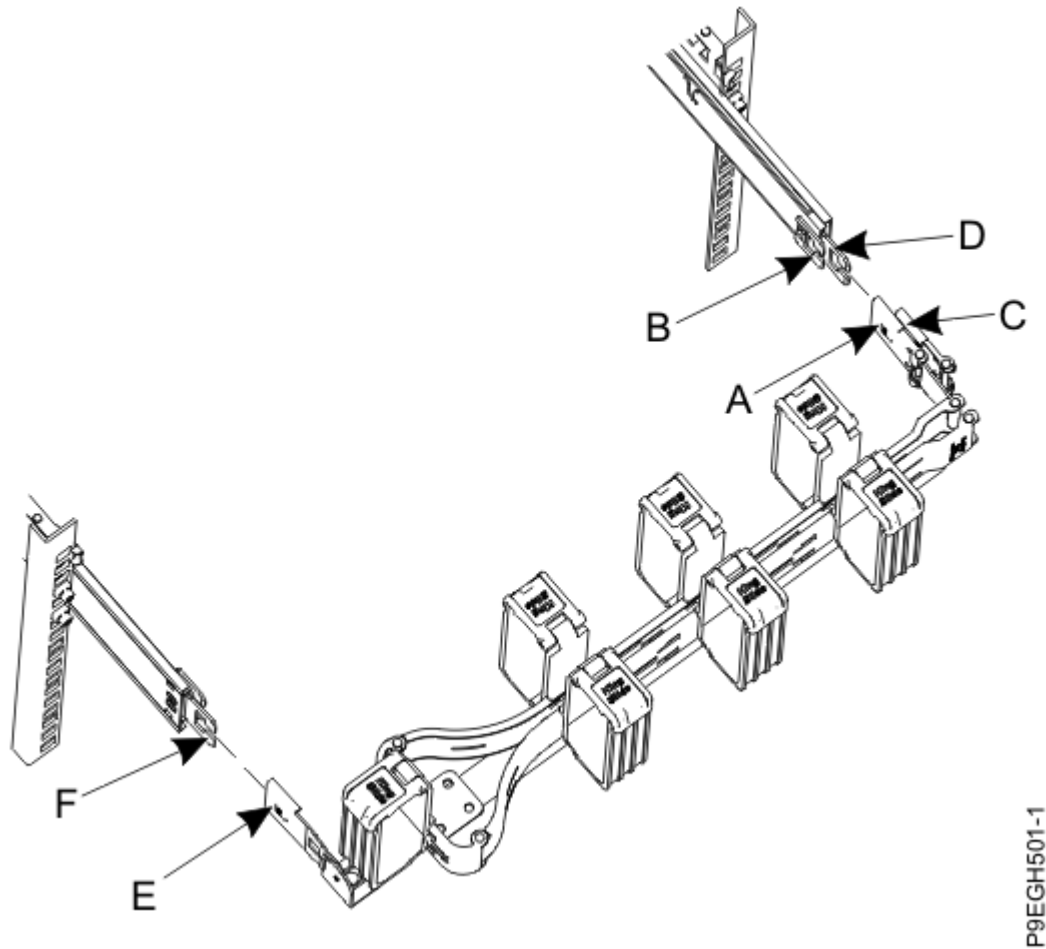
Relative positions of the parts of the cable-management arm before assembly
